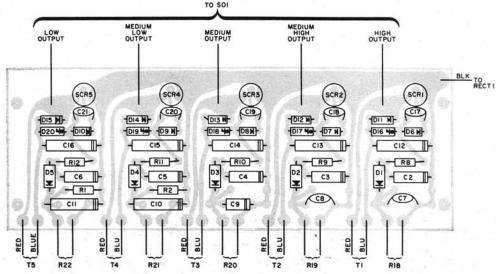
When mounting parts on the printed circuit board, be sure to position the diodes with the polarity markings as shown. Also, make all input and output connections from terminal pins on the circuit board.
